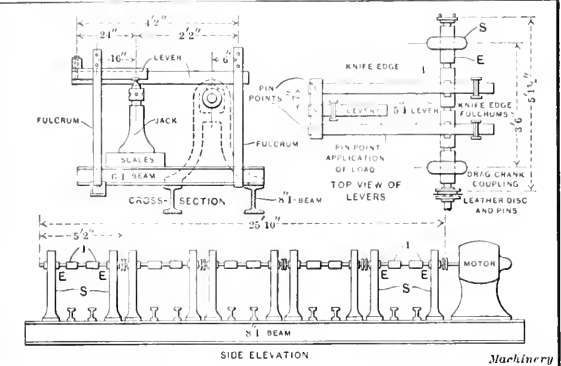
Diagram of Apparatus for testing Lineshaft Bearings
